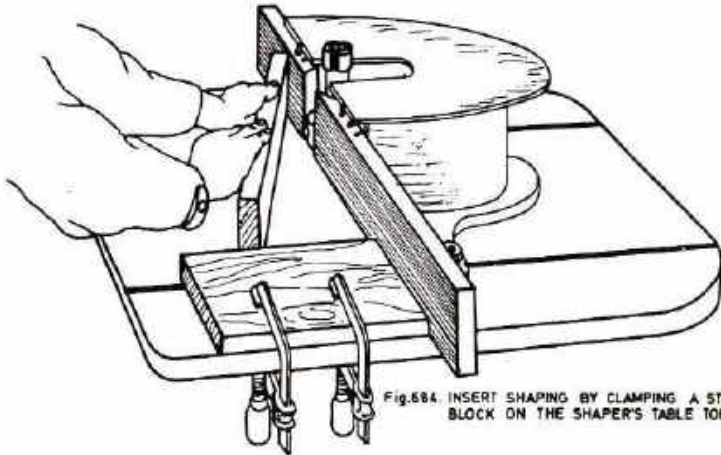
INSERT SHAPING BY CLAMPING A STOP BLOCK ON THE SHAPER'S TABLE TOP
